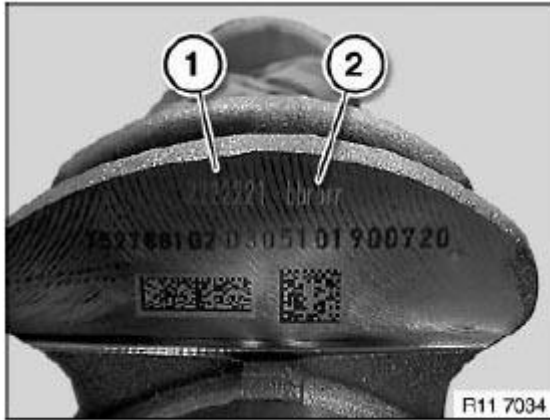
Identifying Main Bearing Classification Number On Crankcase Lower Half (Bedplate)
